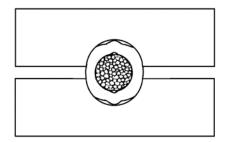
fitting has been rotated 90°. Dies have been closed to first contact fitting.
